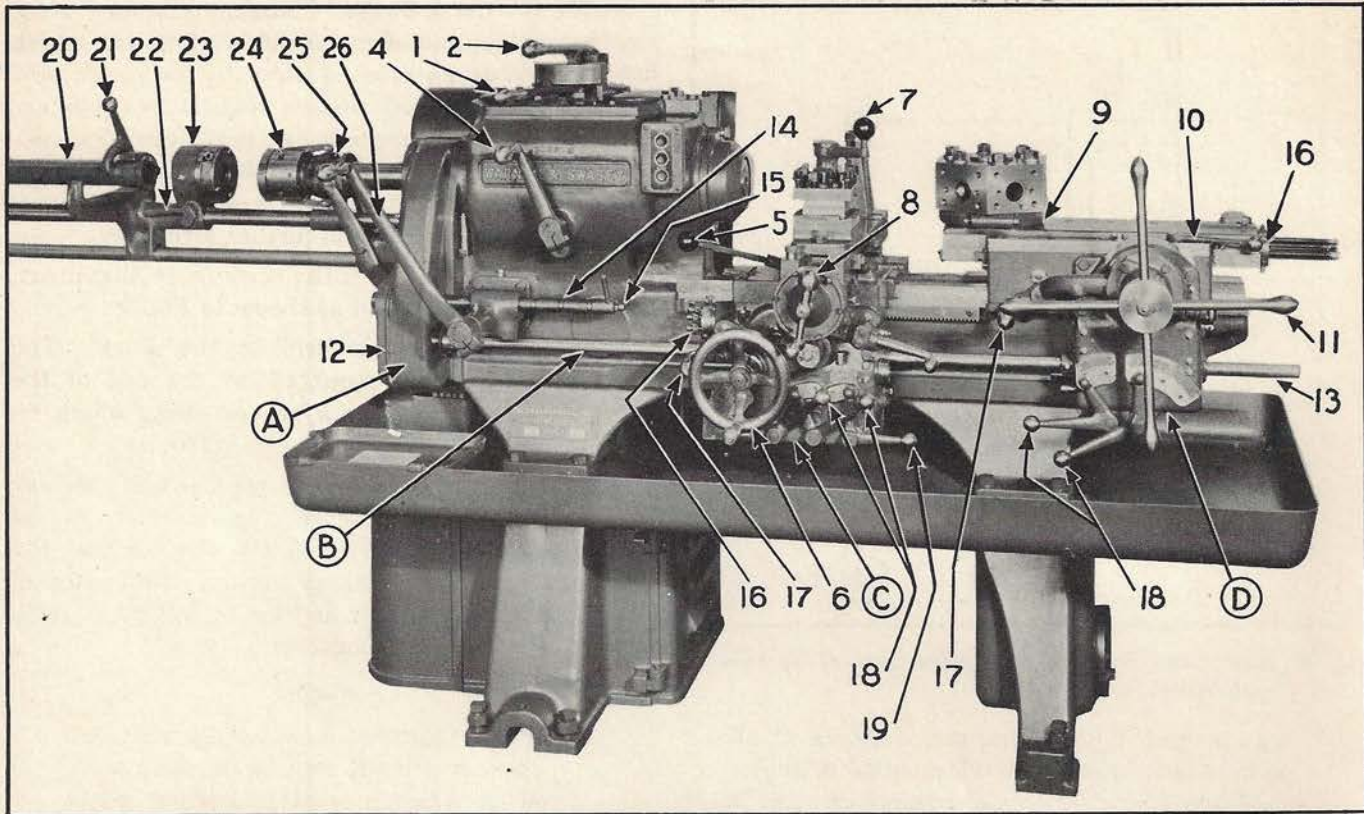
No. 3 Six Speed Universal Turret Lathe
